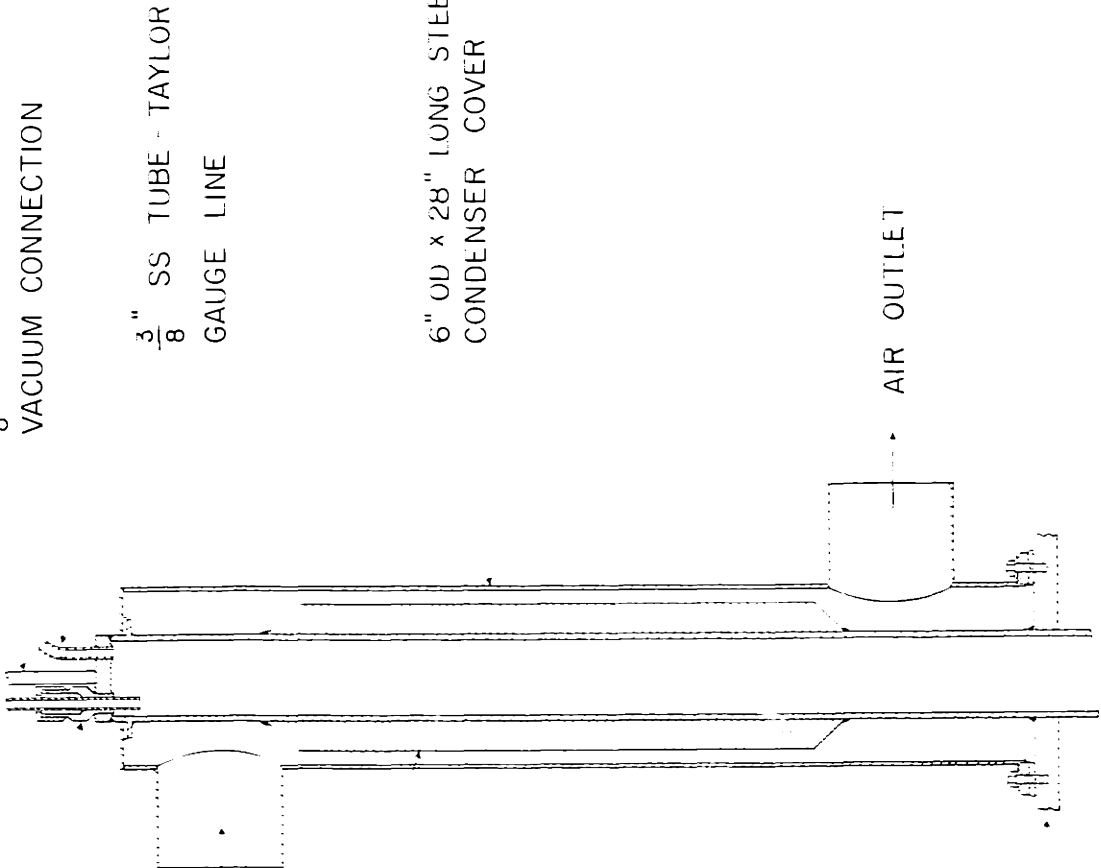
HEATER & BOILER SECTIONAL DRAWING
